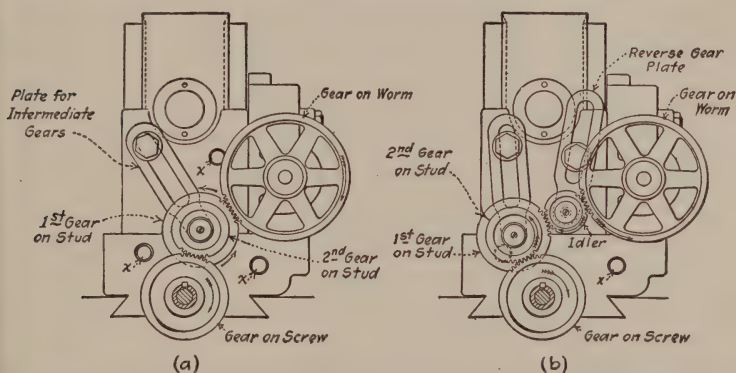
Brown & Sharpe change gears arranged (a) for right-hand spiral, and (b) with idler introduced for cutting left-hand spiral.
